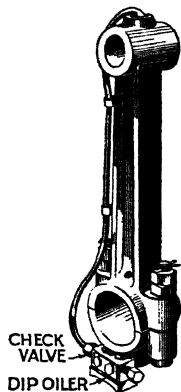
Connecting rod, showing dip oiler by means of which oil is pumped to the crankpin and wristpin bearings of the compressor shown in Fig. 133. (Courtesy Socony-Vacuum Oil Co.)
